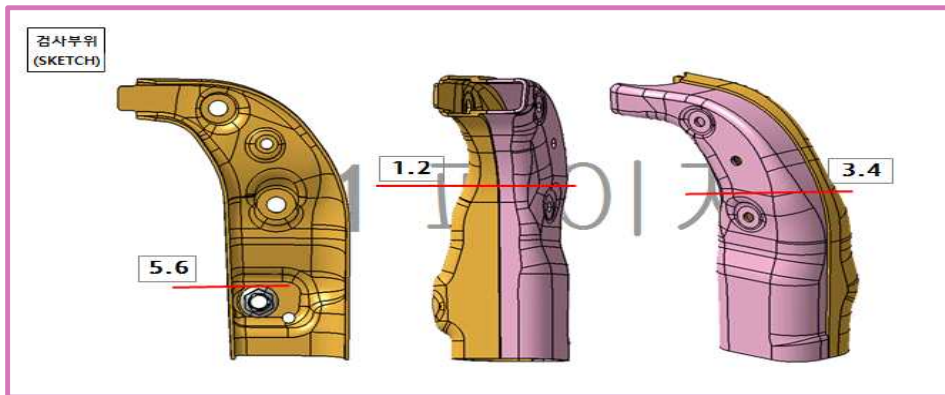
Measured location of welded joint in Multi-shape composite mold(LH) for the inspection
